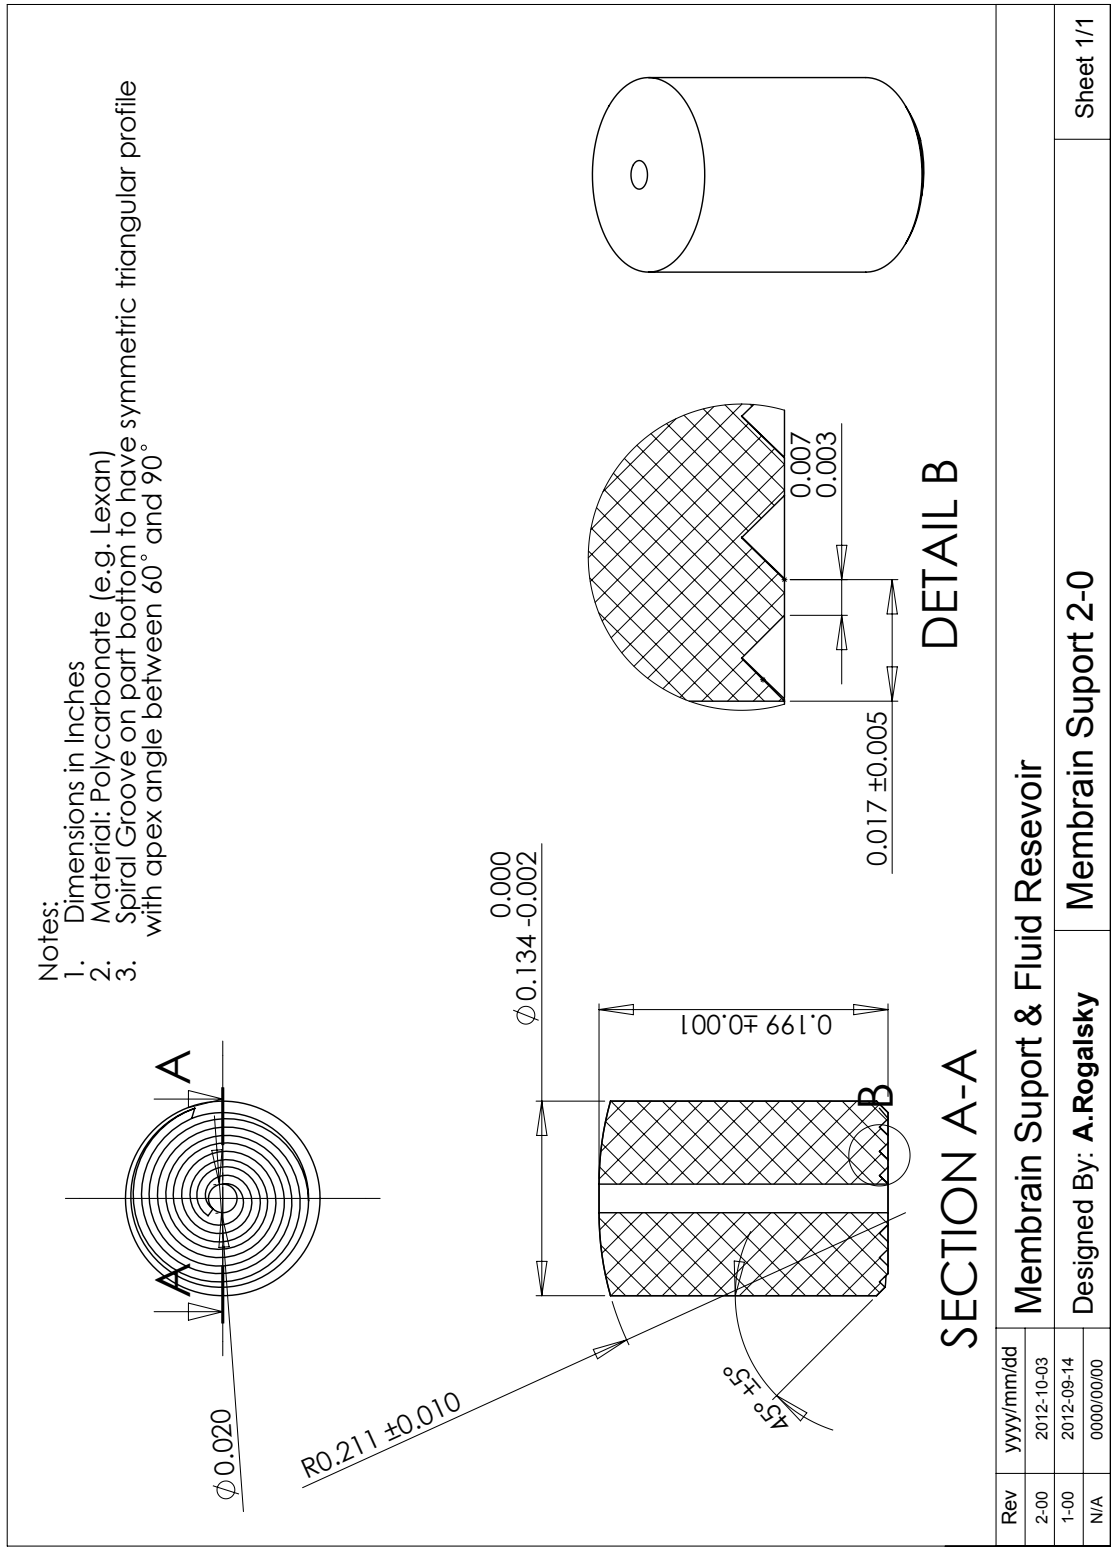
Transducer Osmometer Core Assembly / Membrane Support
